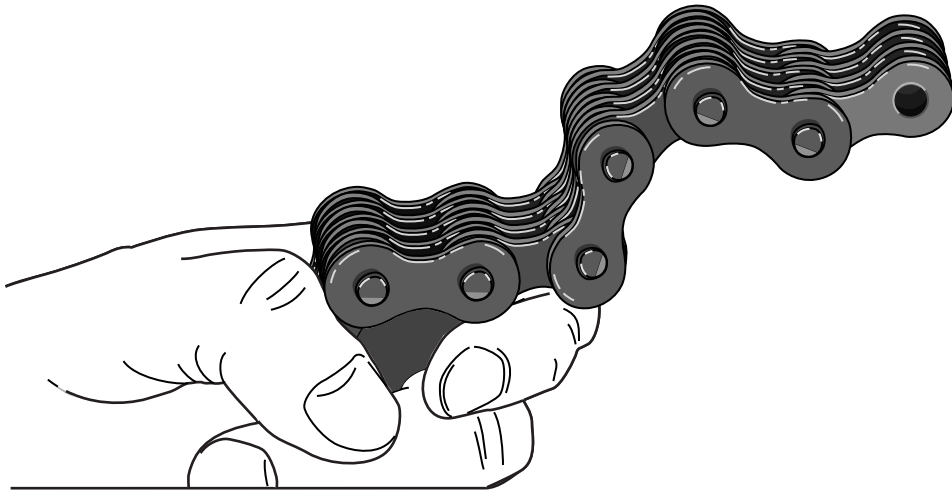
TIGHT JOINTS PREVENTING PROPER FLEXING OF LEAF CHAIN
